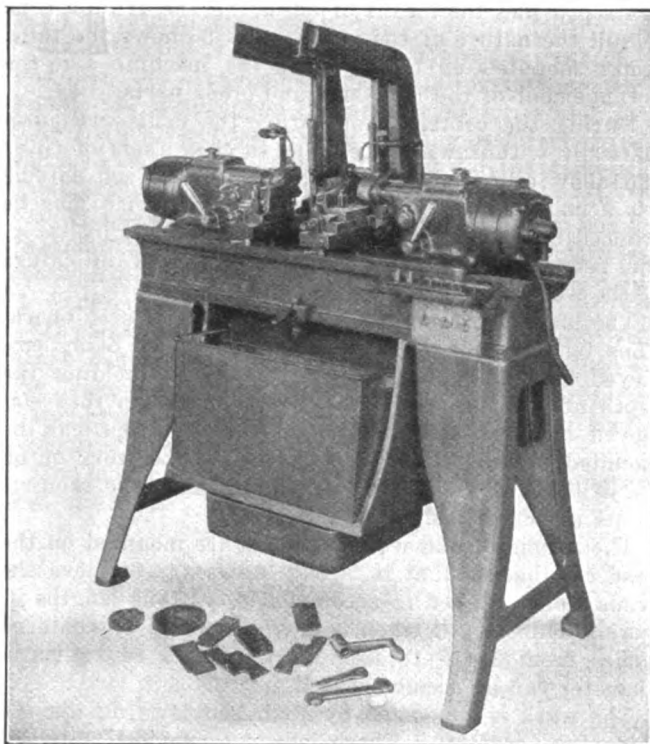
PRATT & WHITNEY AUTOMATIC CENTERING MACHINE
